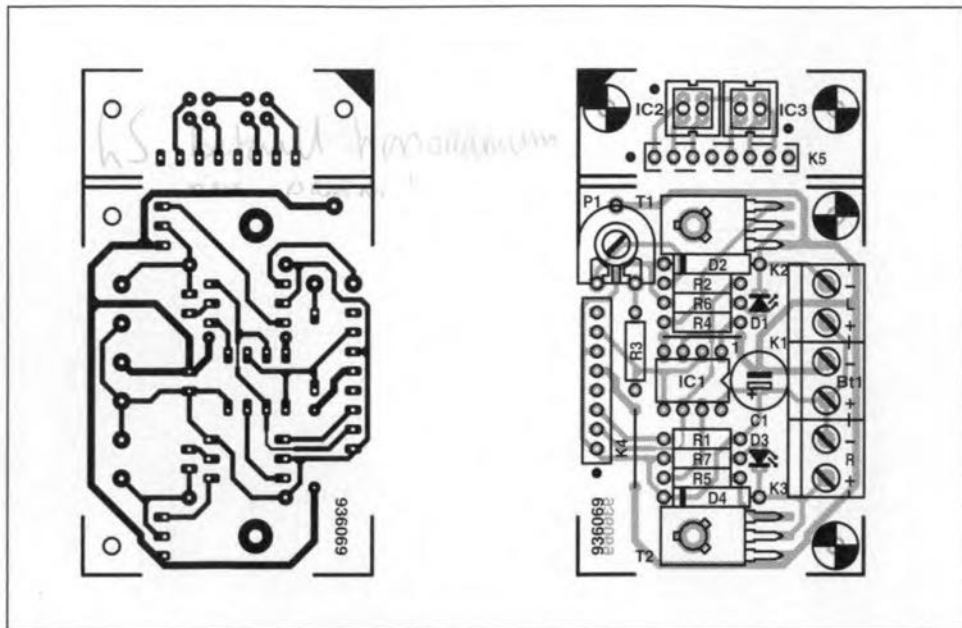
Track layout and component mounting plan of the printed circuit board designed for the mini robot car (board available ready-made, see page 70).
